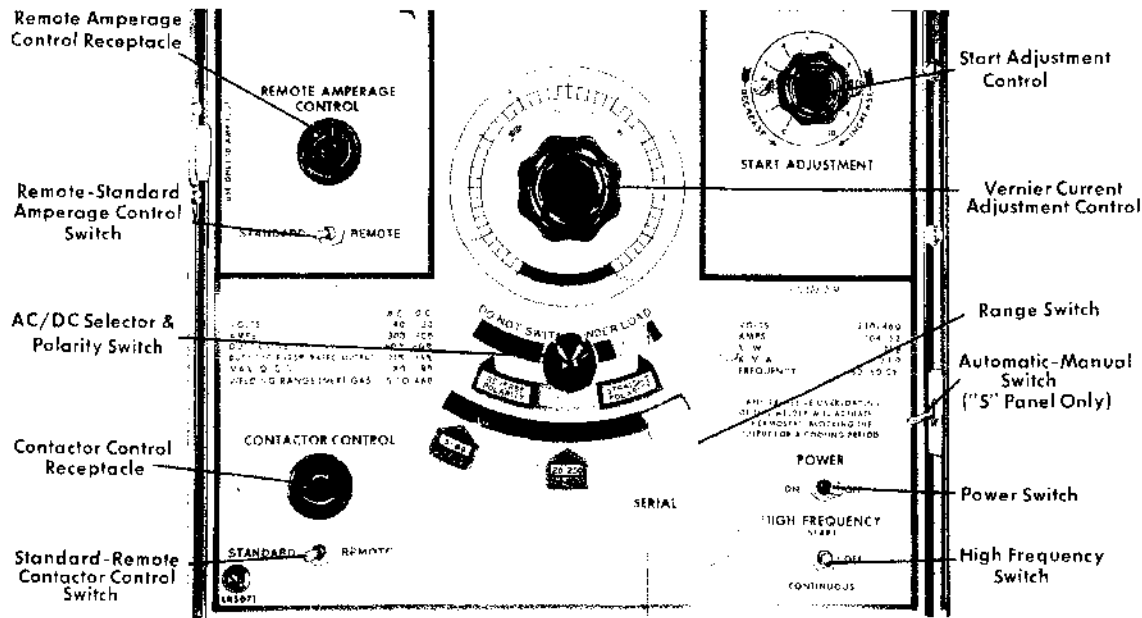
CONTROL PANEL VIEW OF WELDING MACHINE
